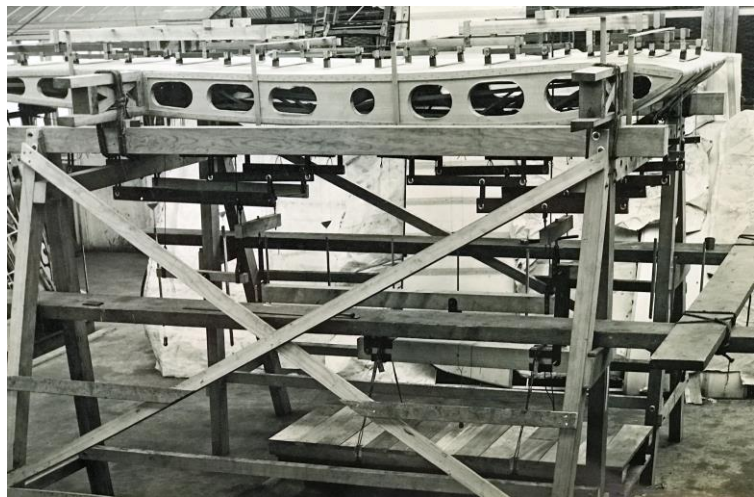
Stress testing jig in operation on a section of the upper wing. Weights were placed on the platform at bottom.
